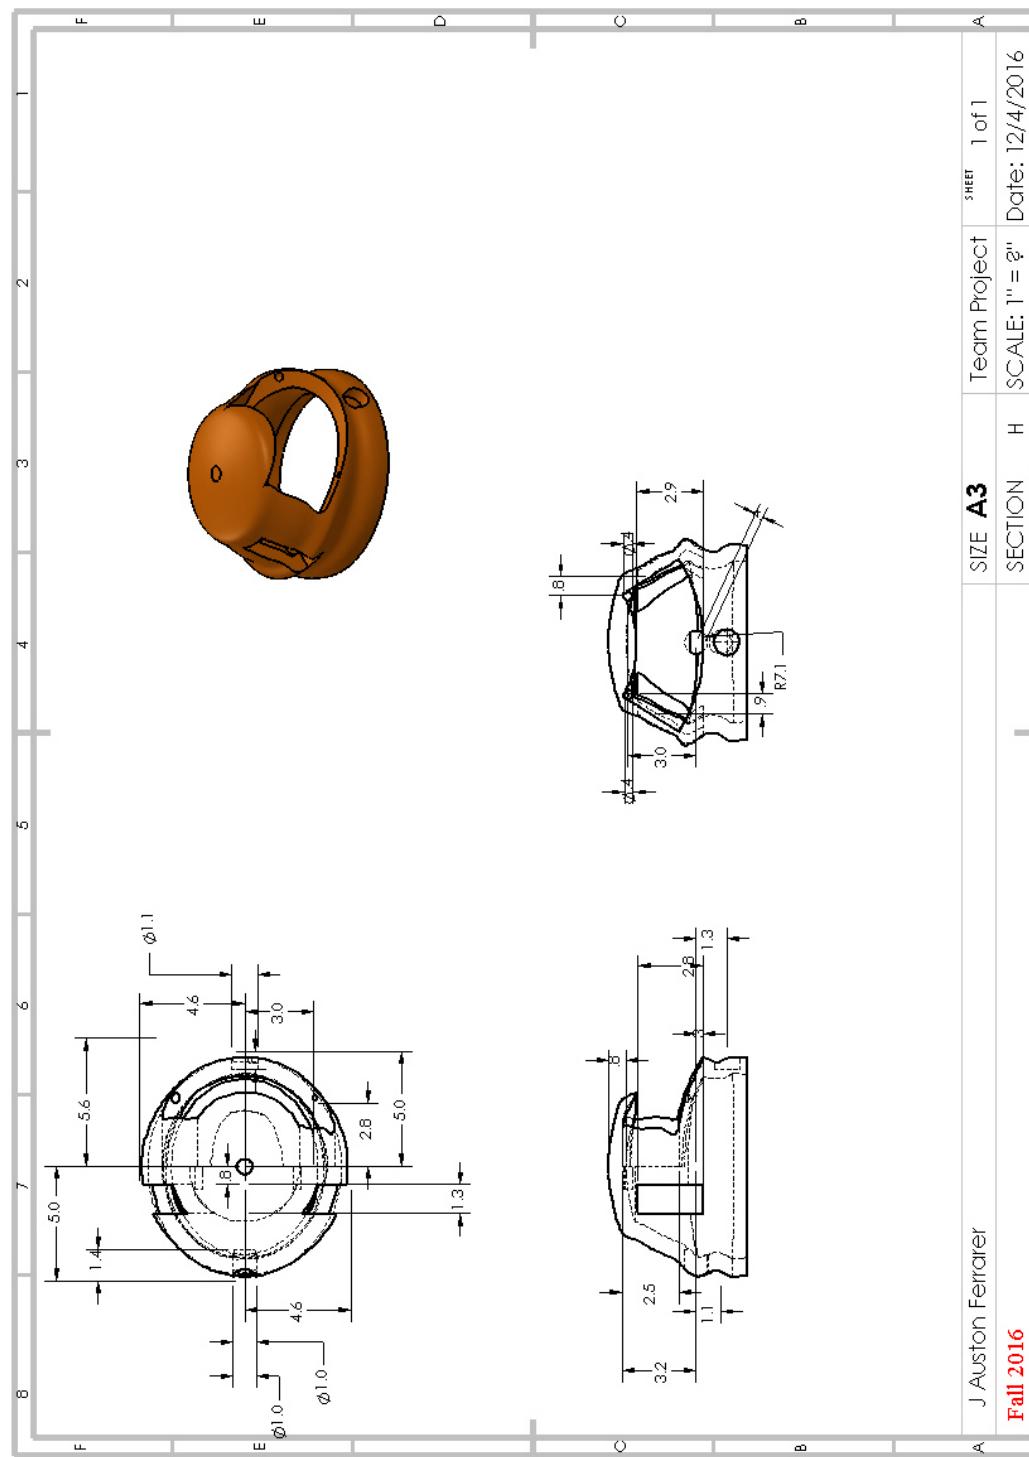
Ferrarer, Auston: Helmet Shell
